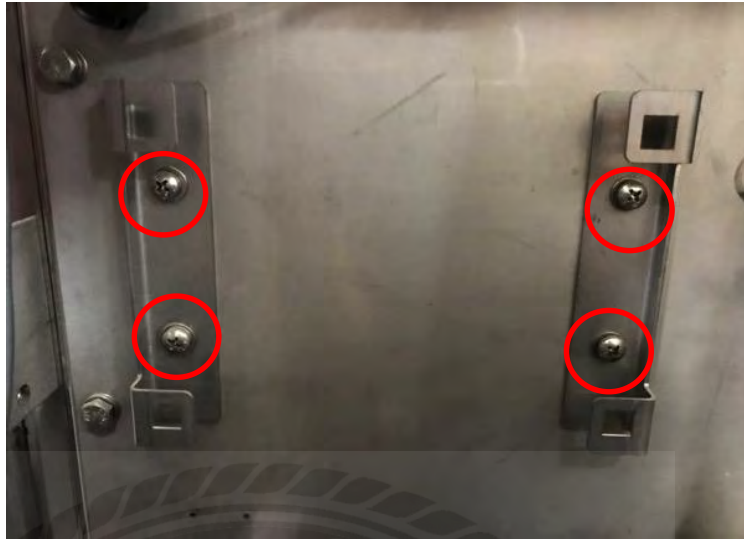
BIB mounting Brackets and the Location of the Screws
